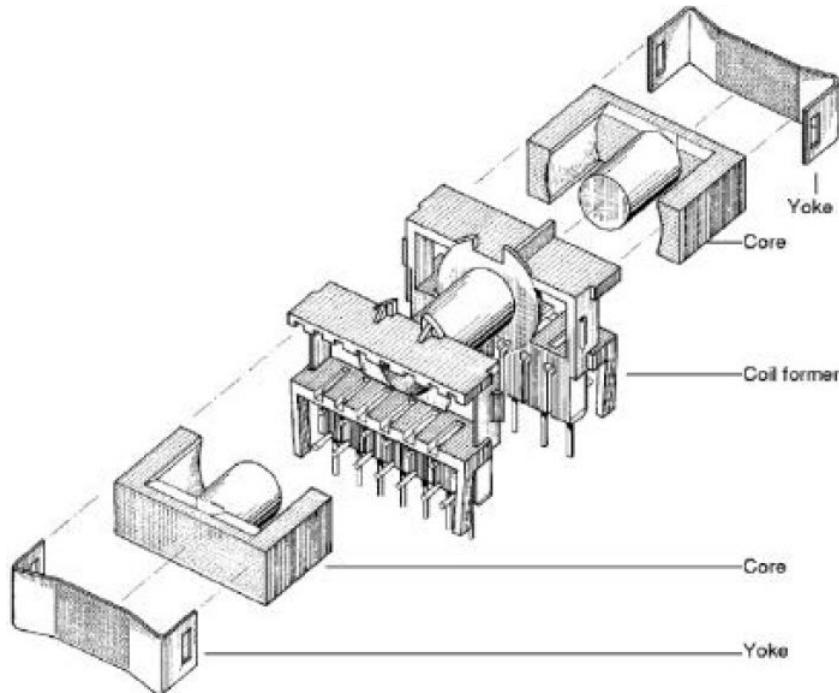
Exploded view of the Flyback Transformer with ETD29 core
